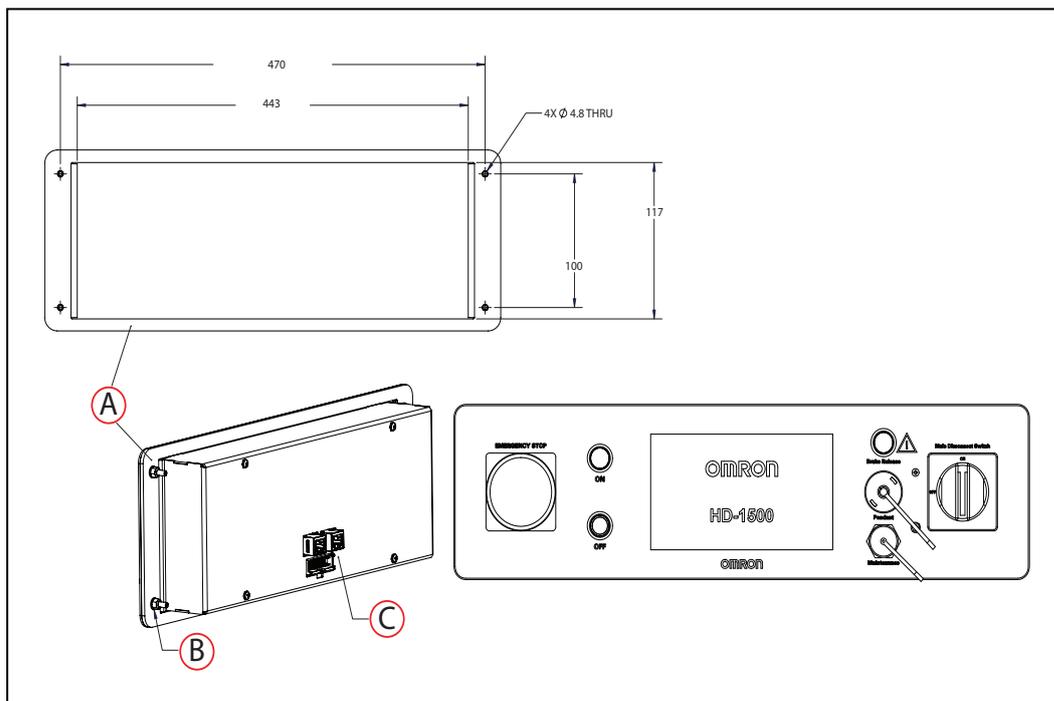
Operator Panel Mounting Bracket Dimensions (units are mm)
